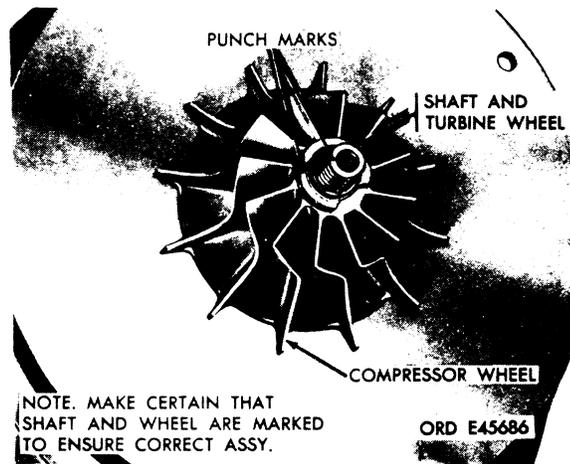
CHECKING ALINEMENT MARKS ON SHAFT AND TURBINE WHEEL AND COMPRESSOR WHEEL - TURBOCHARGER 7748900.
